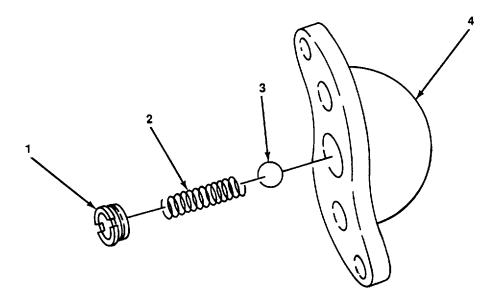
Oil Cooler By-Pass Valve, Repair.
